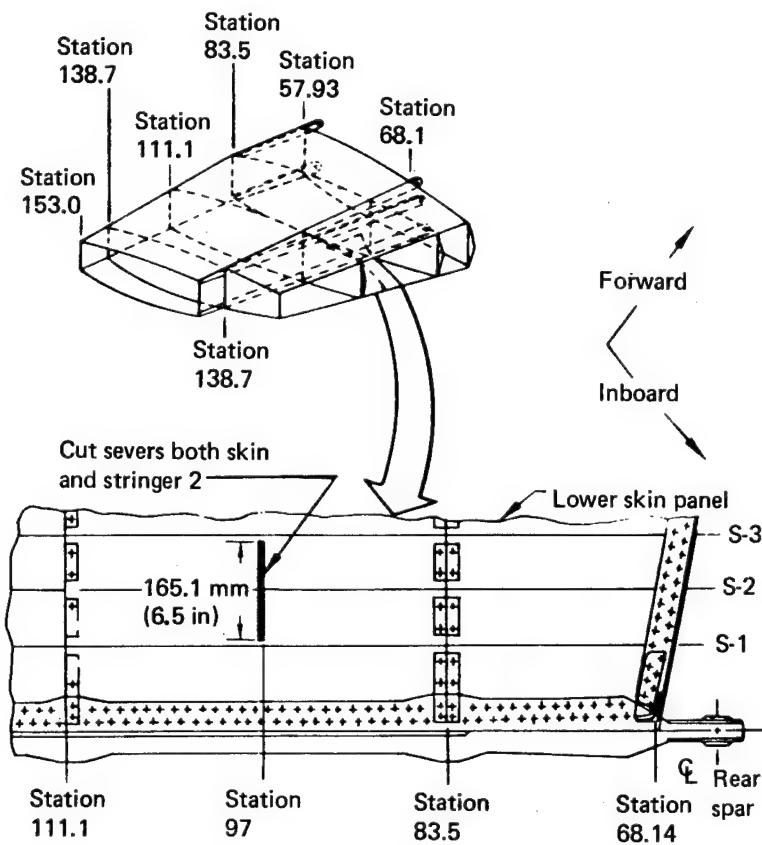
Stub Box Damage Tolerance Test—Lower Surface Skin and Stringer
